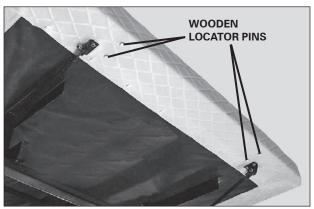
Wooden locator pins mark position of the threaded lugs.
